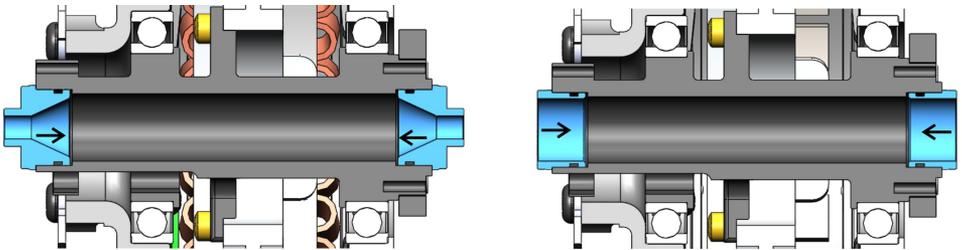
Mounting the Disc Rotor, Standard (left) and Fatbike (right). A narrow 1.5 mm spacer may be used under disc rotor for larger caliper clearance. See Section 8.2 Disc Caliper Clearance.
